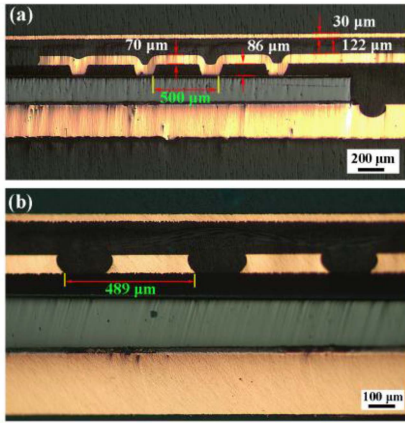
Cross section of PCB embedded packaging cell with panel carrier: (a) cross-sectional view with RDL connected to SiC MOS and (b) cross-sectional view with RDL unconnected to SiC MOS.
